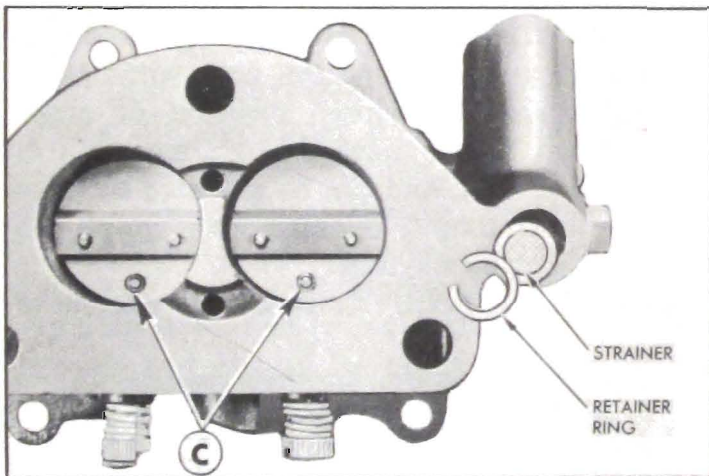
Vacuum Switch Strainer and Throttle Valves
